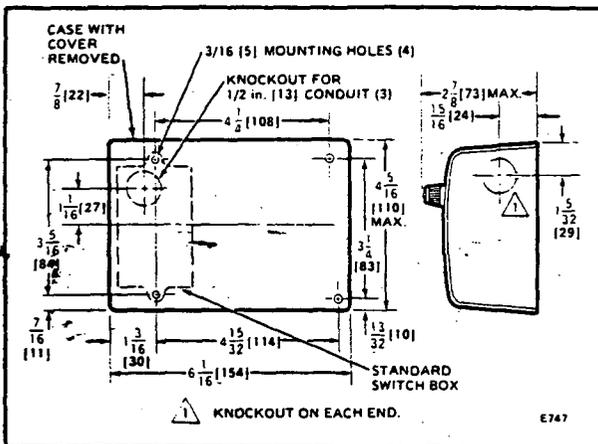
T631 INSTALLATION DIMENSIONS, IN in. [mm SHOWN IN BRACKETS].
